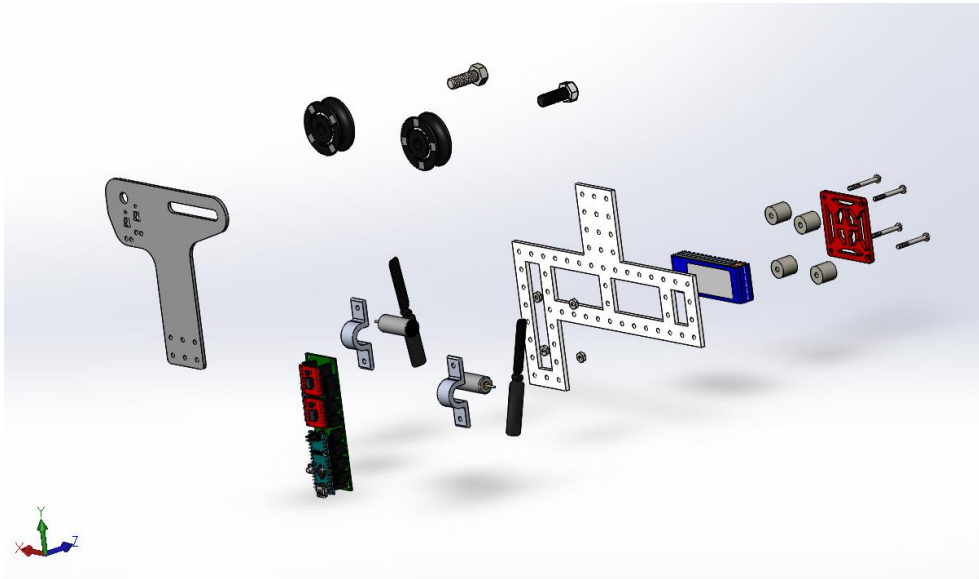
AEV exploded view after implementing the design combinations and conducting mass and motion studies.
